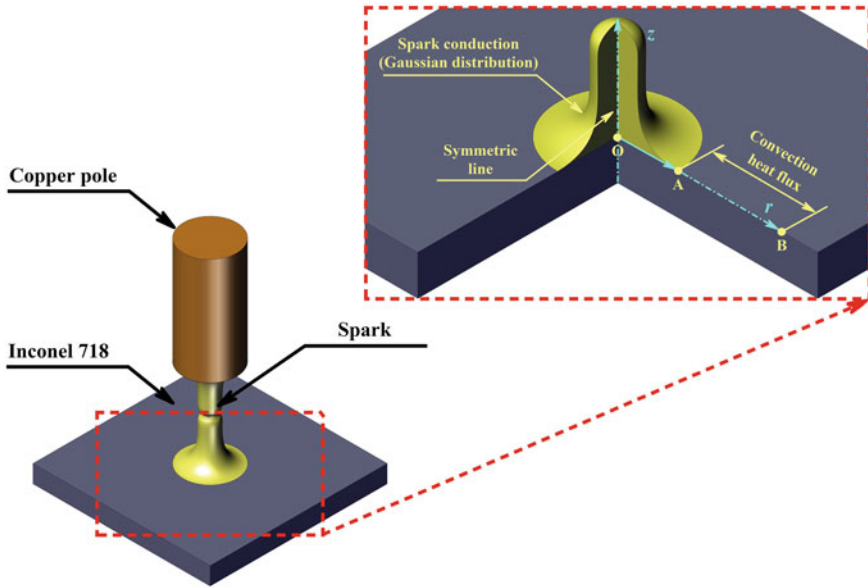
Spark mechanism to machining Inconel 718 in EDO system
